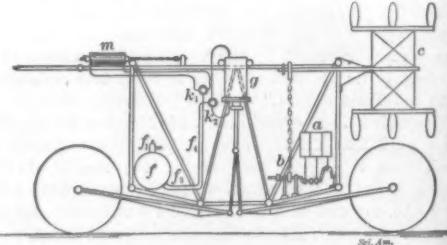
Auxiliary Motor for Actuating the Wings and Legs.
